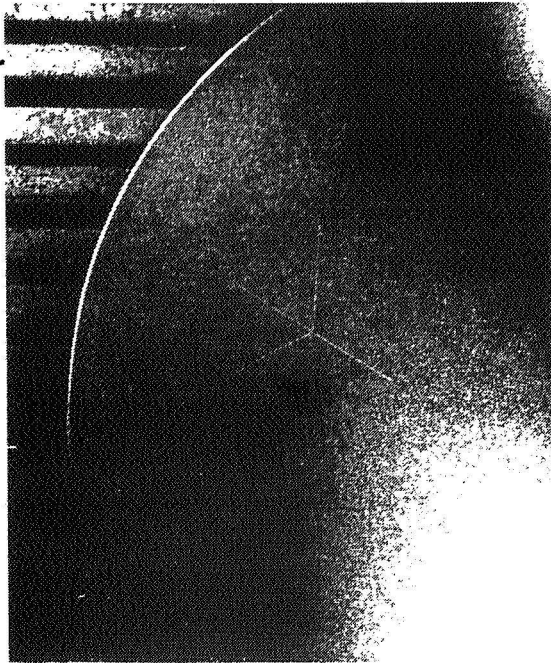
Crow's-foot fracture from burr on vacuum chuck.
